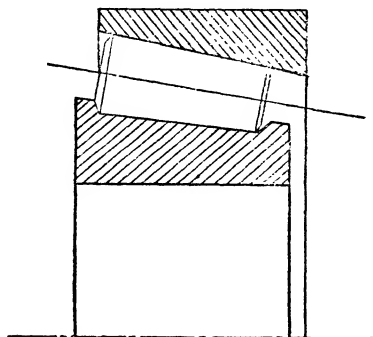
Roller bearing widely used for carrying radial and thrust loadings.
